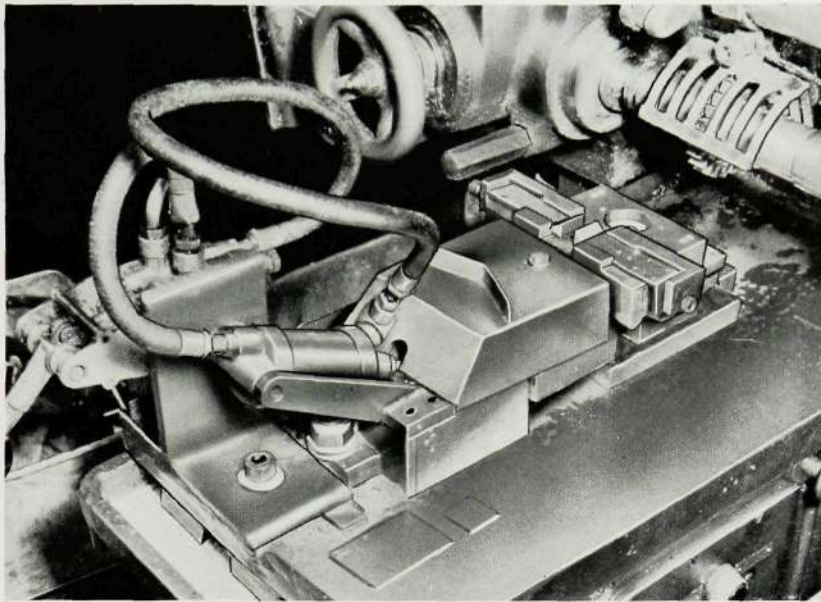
Milling set-up, for “standardizing” the lug-face head-face dimension, and “topping” the knife edges, on two components at a time
